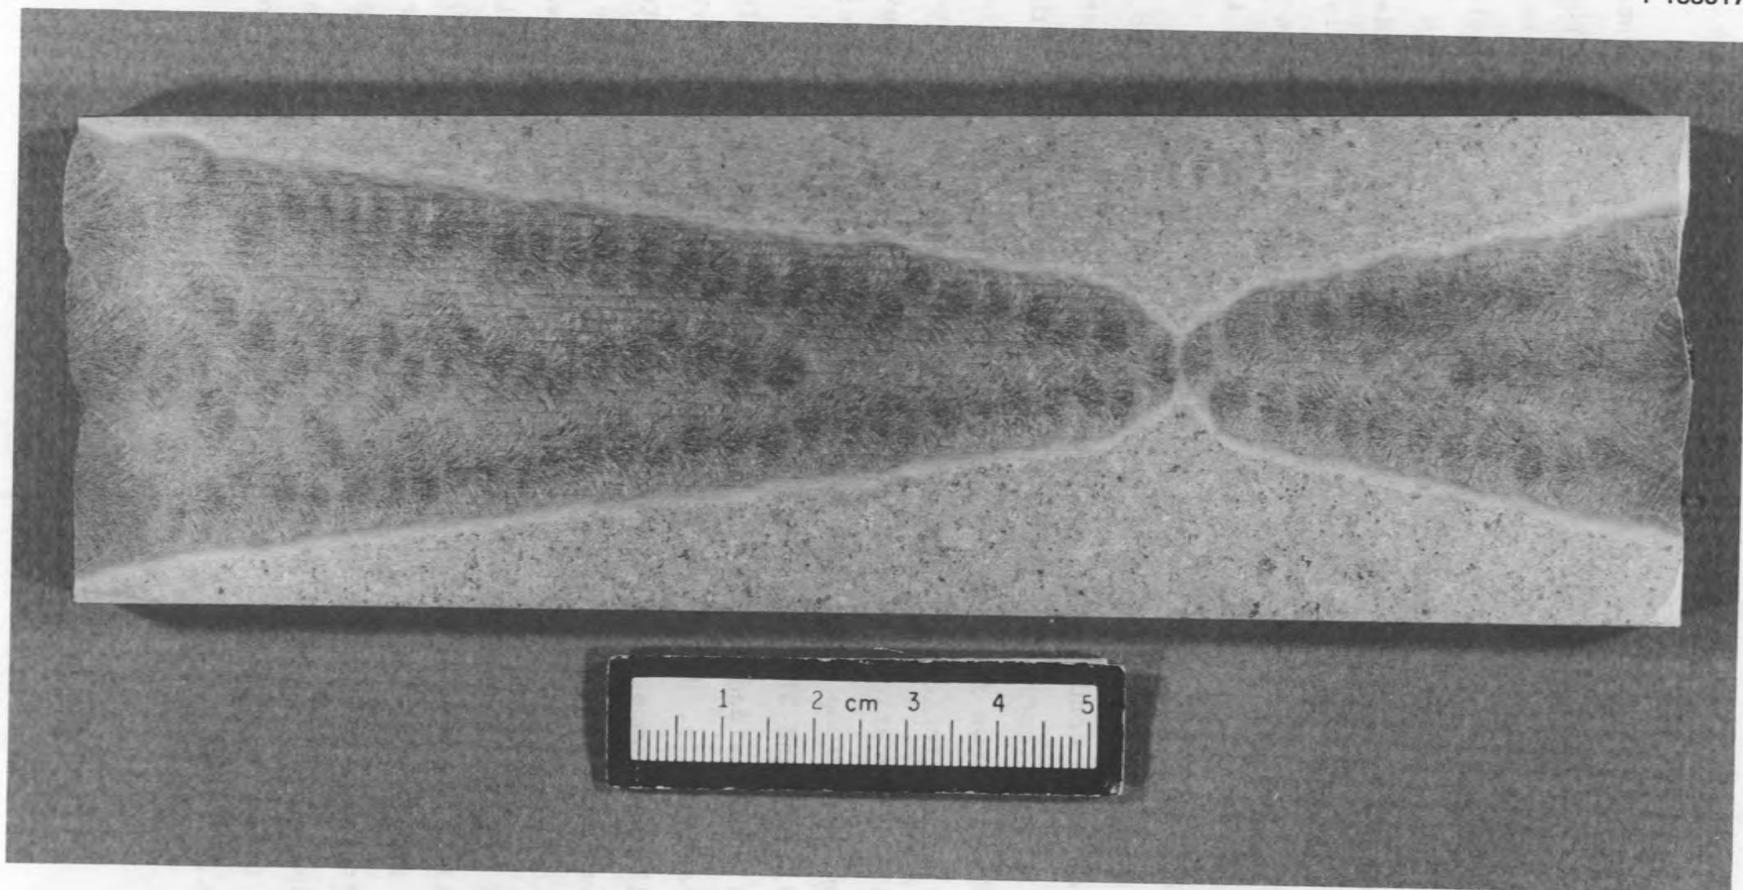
Cross-sectional view of weldment JFK 308.
